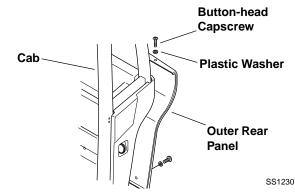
Install the plastic washers and button-head capscrews securing the outer rear panel to the cab.
